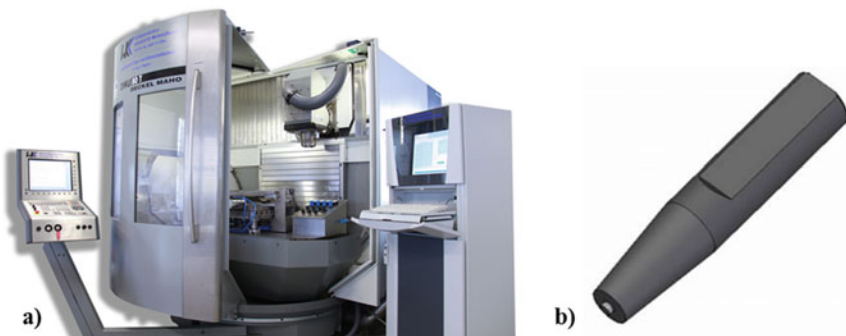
a Machining center DMU80T, b 3D-model of a FSW-tool [2]
